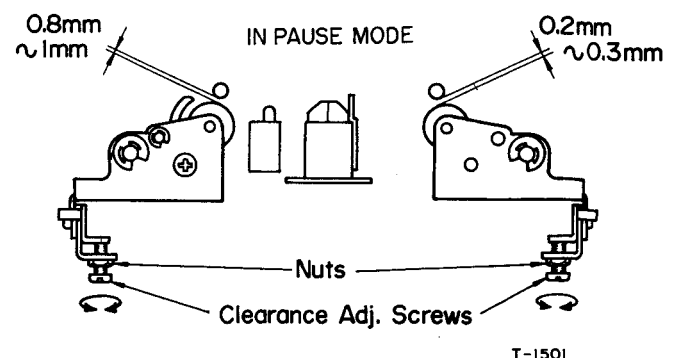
Adjusting Capstan Shaft/Pinch Roller Clearance
